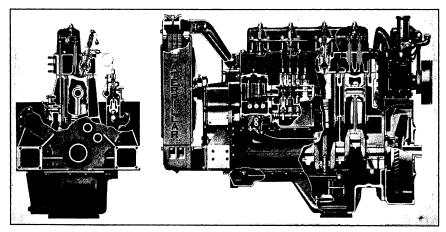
Caterpillar D-4400 Diesel Engine.
